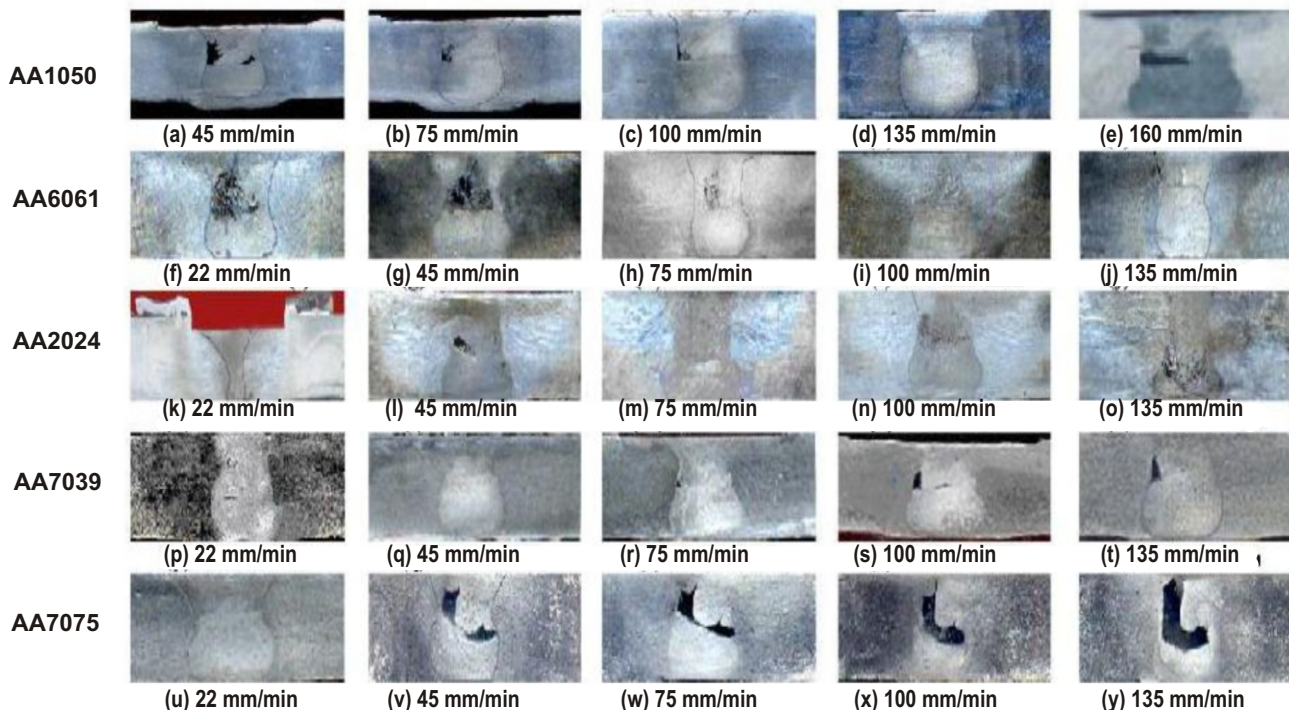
Effect of welding speed on macrostructure of aluminium alloys (tool rotational speed = 1200 rpm and axial force = 8 kN). V. Balasubramanian [39]
